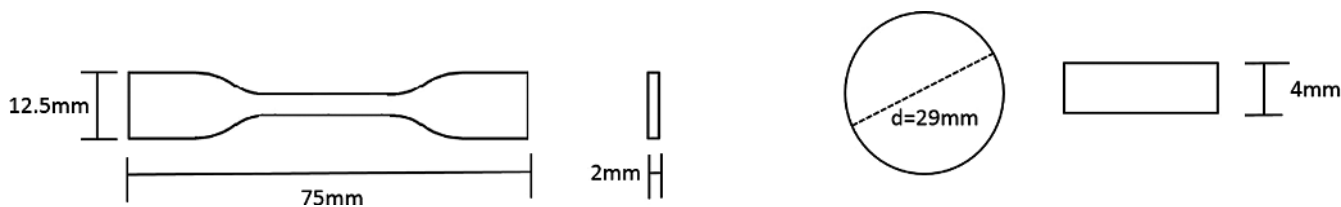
Geometry of the employed specimen according to DIN 53504 (left – tensile bar S 2) and DIN 815 part 1 (right – puck)
